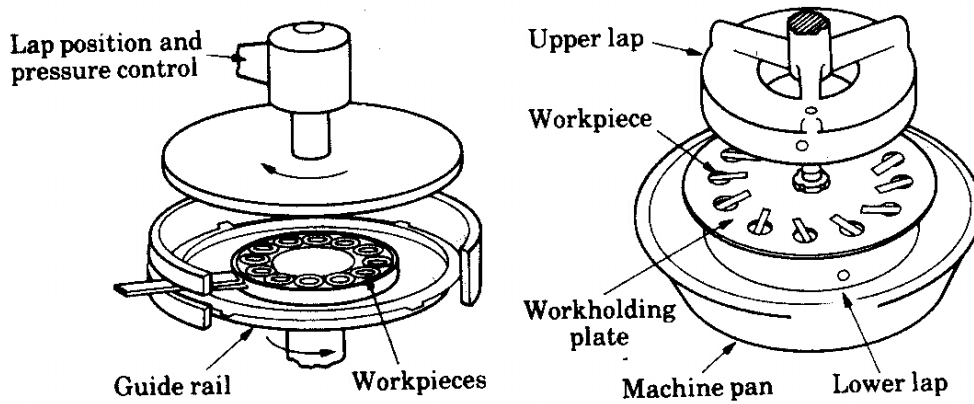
Production lapping on (a) flat surface (b) cylindrical surface
